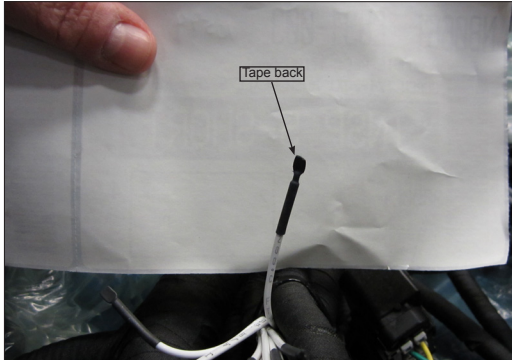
Extract the Wires From the ECM Connector and Install Wire Kit Wires
